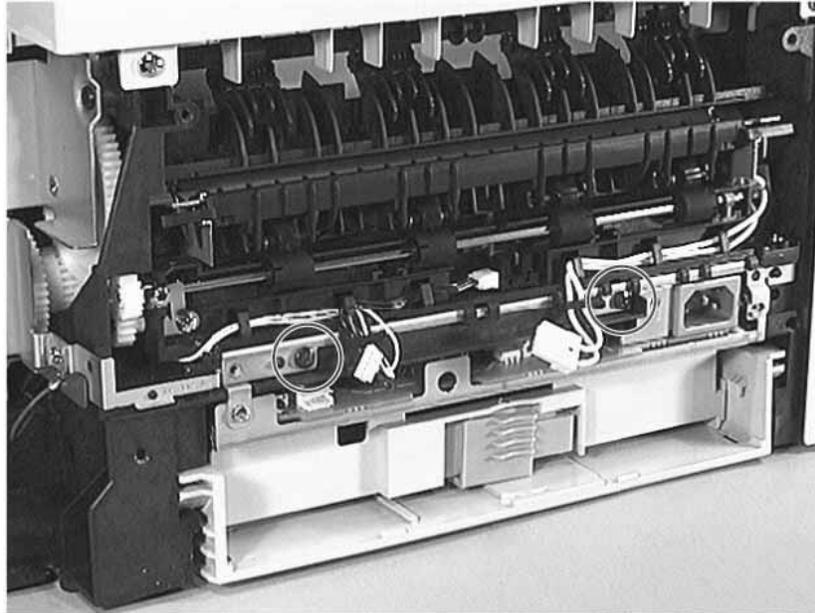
Removing the Fusing Assembly's Grounding Plate Screws
